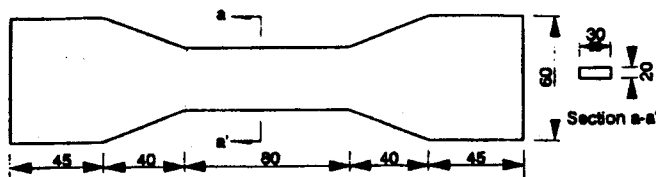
Shape and dimensions (in mm) of specimens tested under tension
